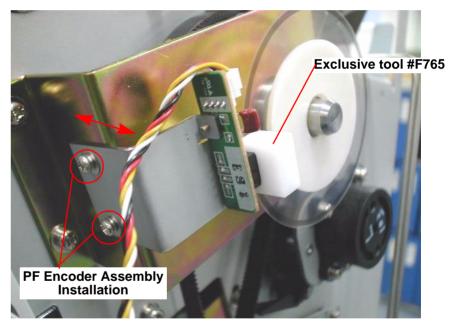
PF Encoder Sensor Installation Position Adjustment 2
